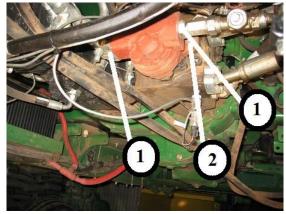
Original Hydraulic Fittings Key 1 – Hydraulic Fittings Key 2 – M12x35 bolts
